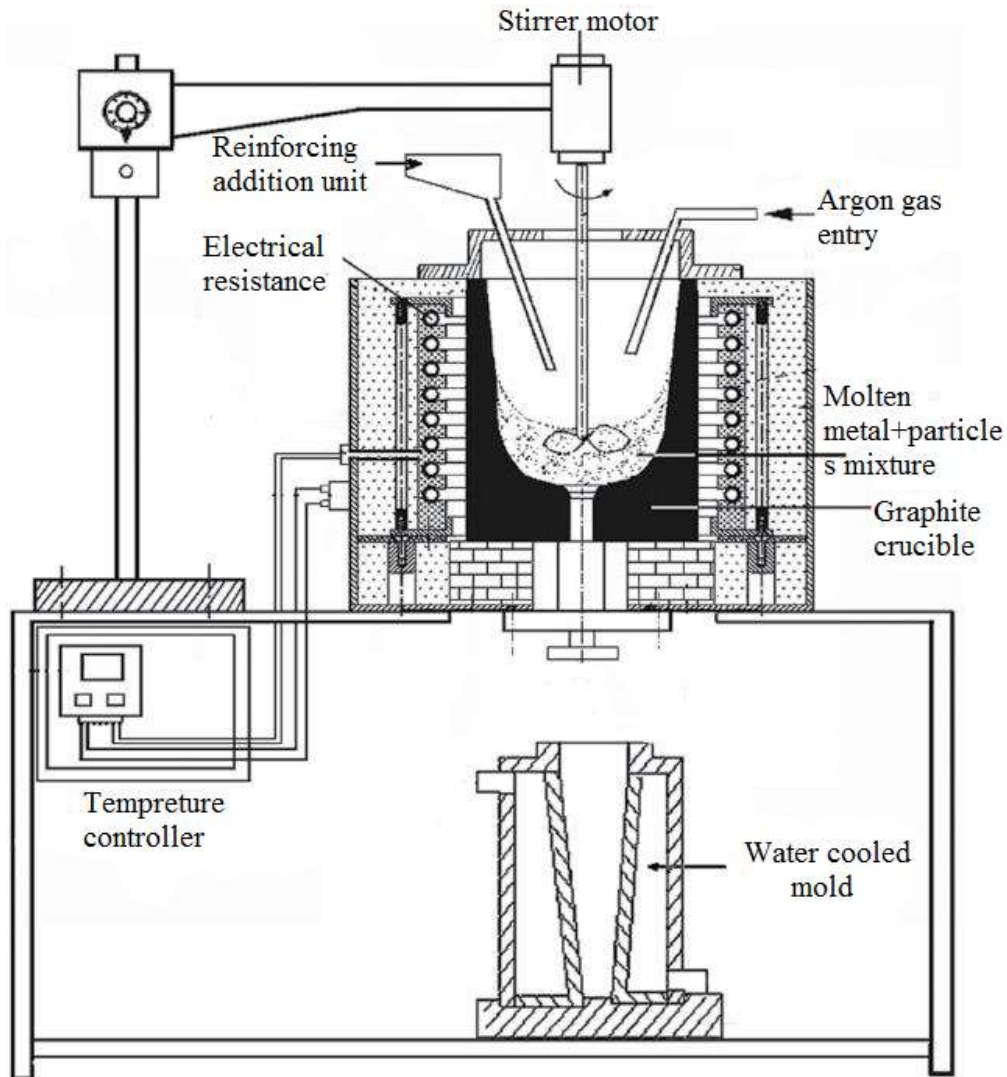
Stir casting machine equipped with inert gas source [20, 22].
